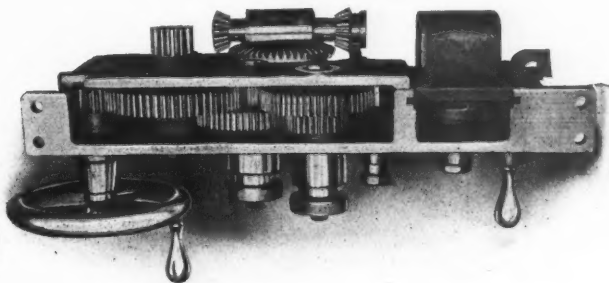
View from the Top of the Apron of Lathe, showing Arrangement of Gearing
